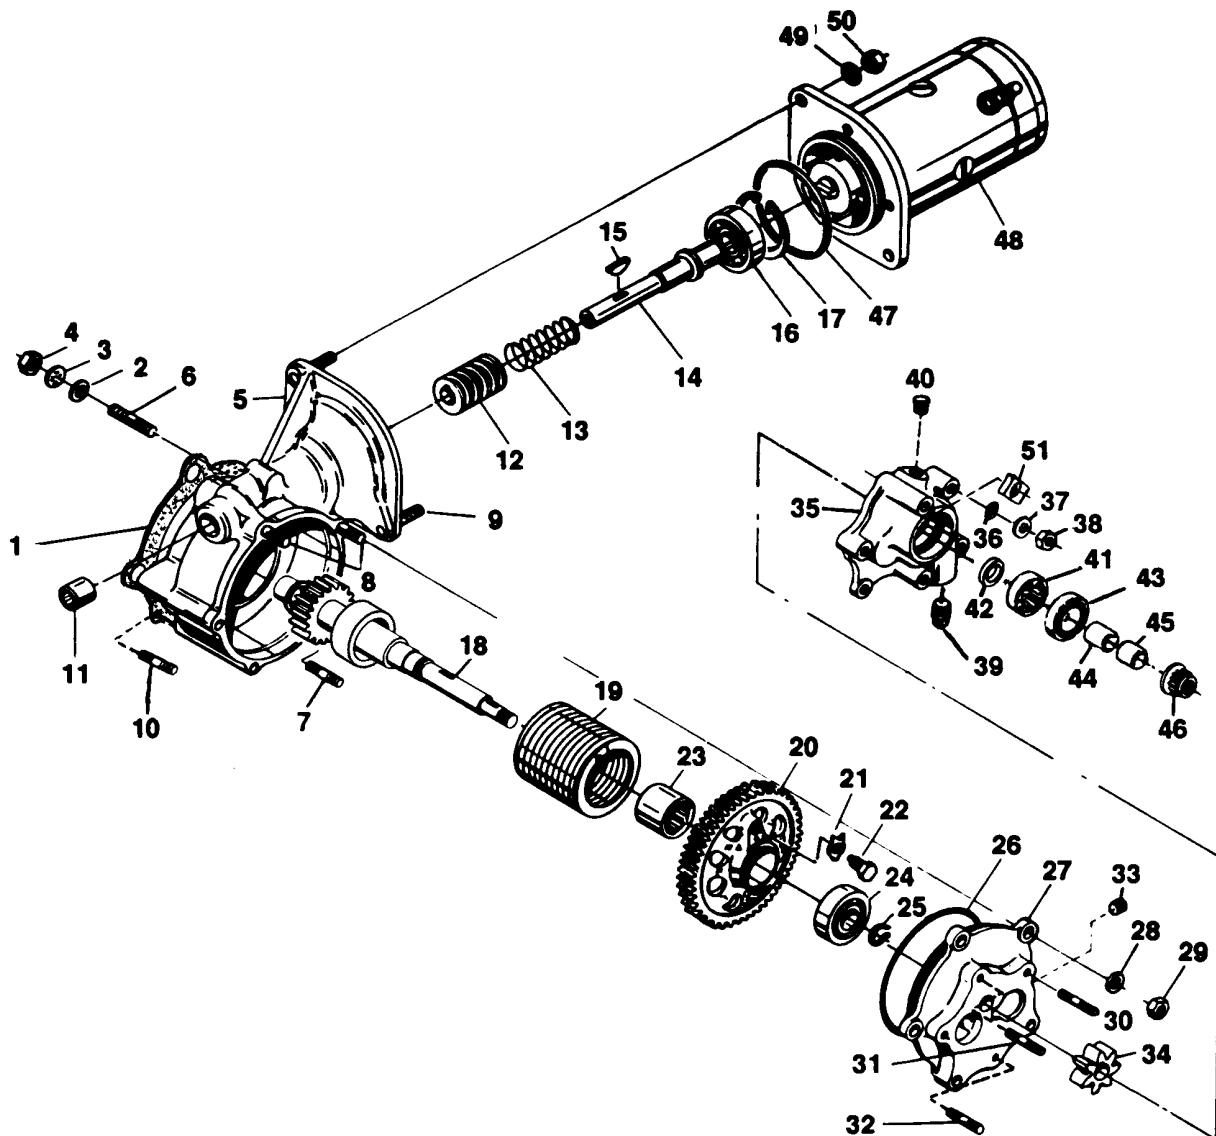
A. STARTER AND STARTER ADAPTER FOR IO-550-A, IO-550-B9A,
